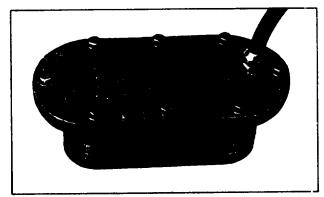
Preparing Oil Cooler Core for Pressure Test
